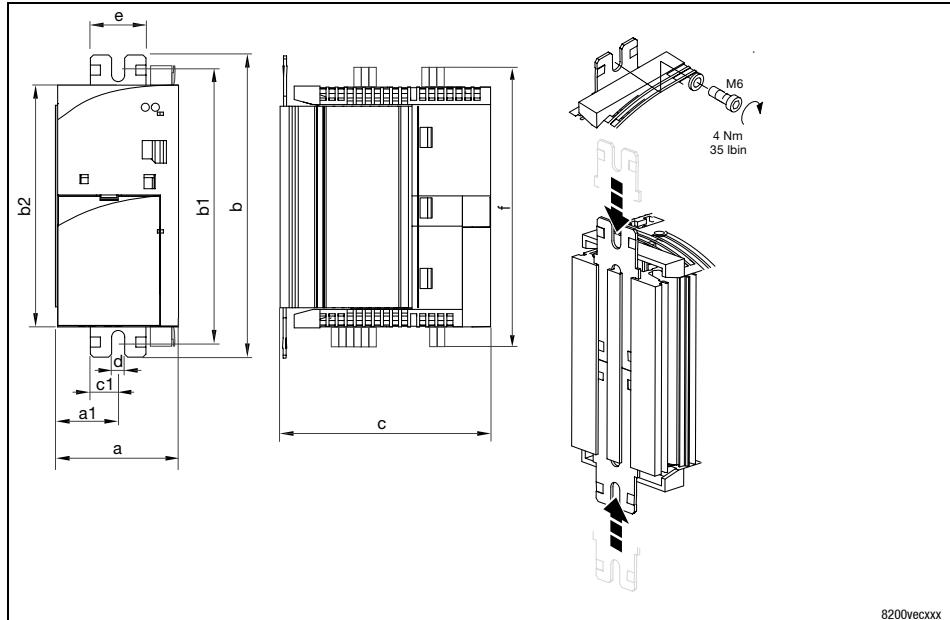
Dimensions for mounting in "cold plate" technique 3 ... 11 kW
